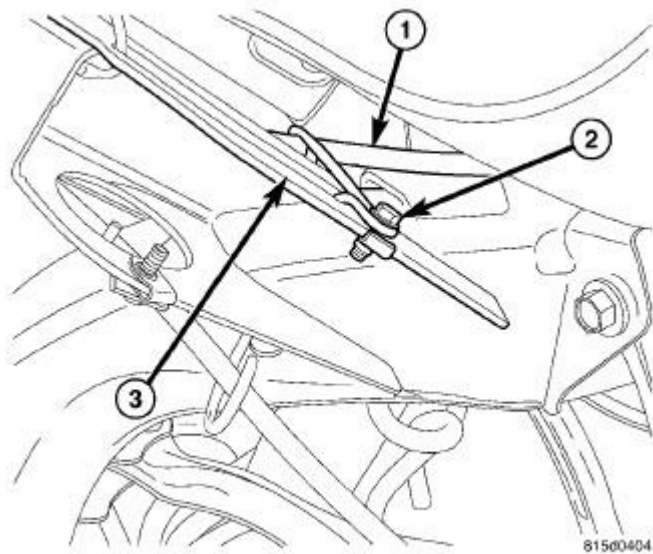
Front Parking Brake Cable, Rear Crossmember Front Flange & Screw
